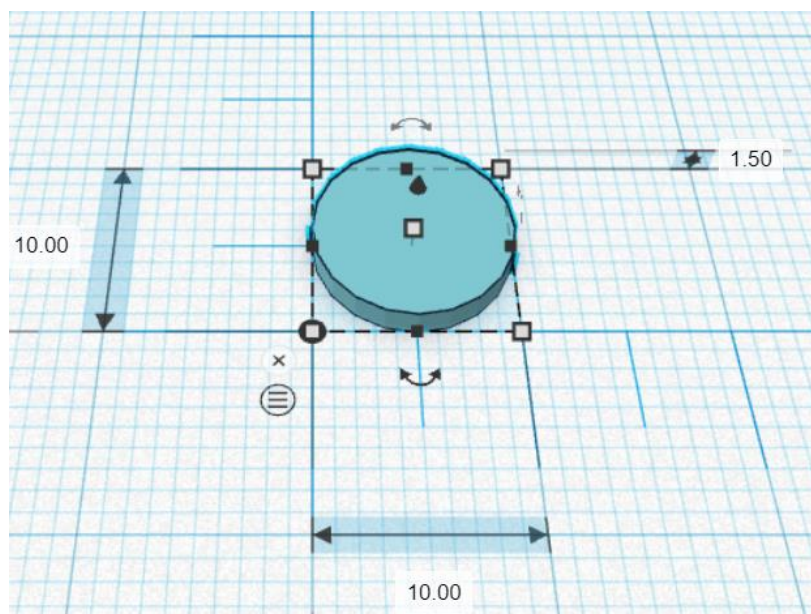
Illustrative example of a CAD model of a cylindrical tablet done using Tinkercad®. Dimensions shown are in mm
